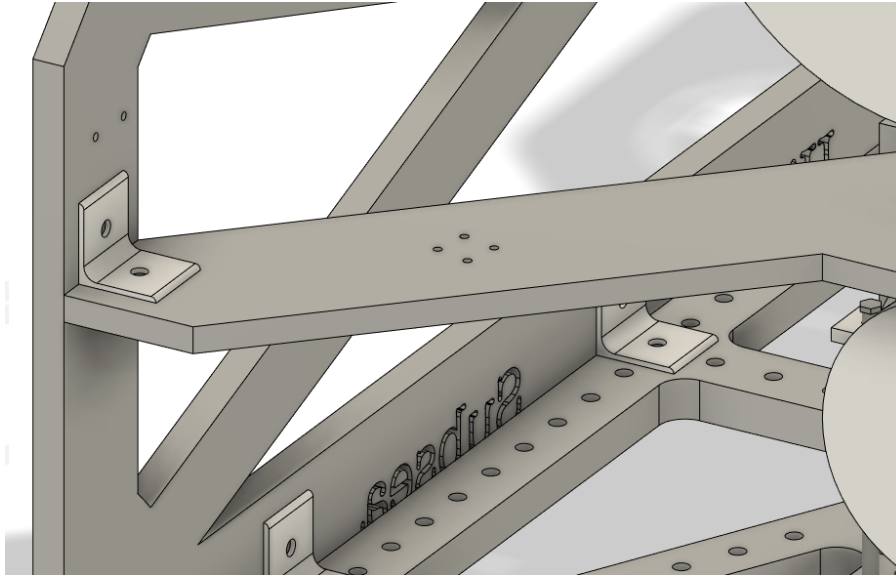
Brackets configuration for the cross-stiffener and side plates connection
